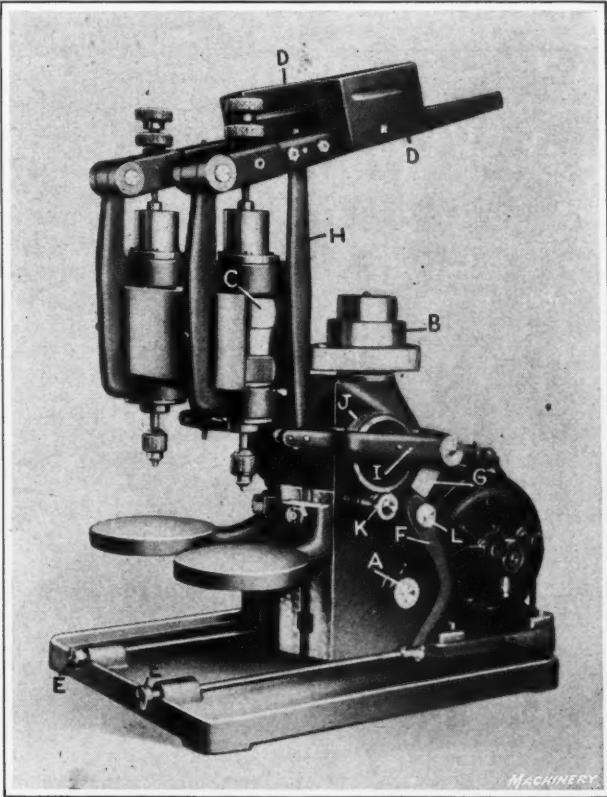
Automatic Sensitive Drilling Machine built by the Kingsbury Mfg. Co. A Timing Mechanism is not provided on this Machine
